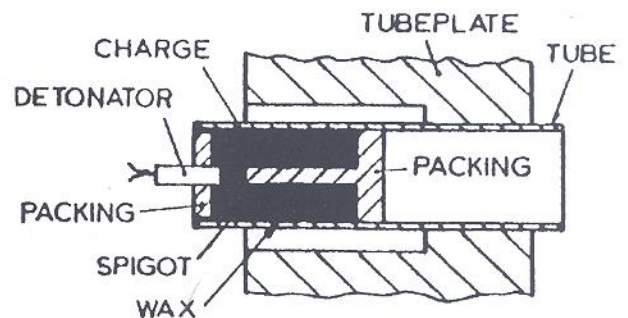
Parallel tube to tube plate welding geometry.
